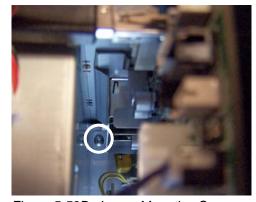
B Lower Mounting Screw, Circled (DM475)
